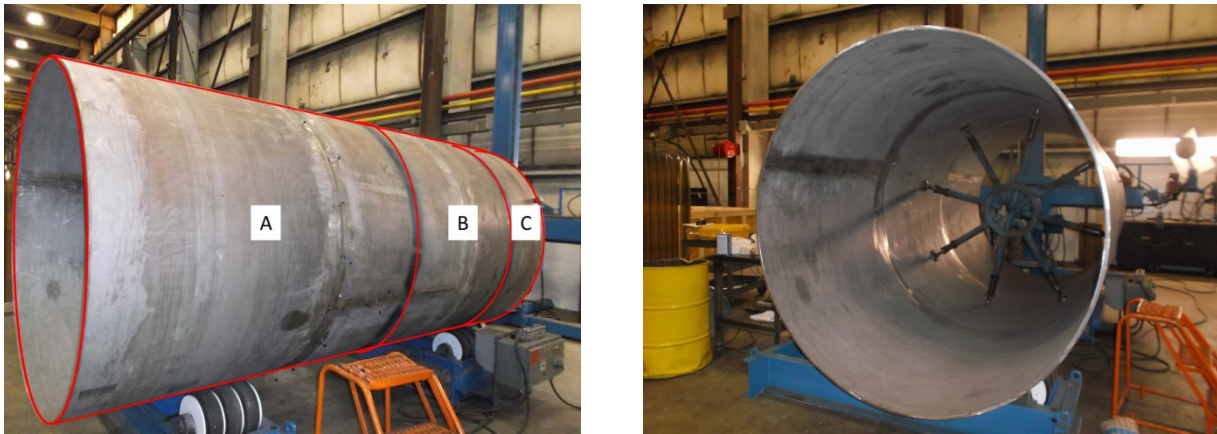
Mock-up container prior to being sectioned. (a) Location of three sections into which the container was cut – one for residual stress analysis (A) and two for specimens (B and C). A temporary spider (b) was placed just below the cut made between sections A and B in order to minimize distortion as the cut was made.
